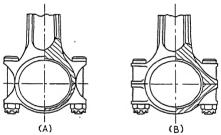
Aircraft-engine connecting-rod big ends. (A) Poor design that was subject to frequent crankpin-bearing failures. (B) Later design that eliminated the failures. (From Ricardo, "High Speed Internal Combustion Engines.")
